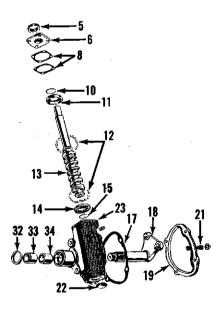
Exploded view of the dual stud type steering gear used on 303 and 404 tractors. A single stud unit of similar design is used on 406 and 1001. Camshaft end play is adjusted with shims (8).
